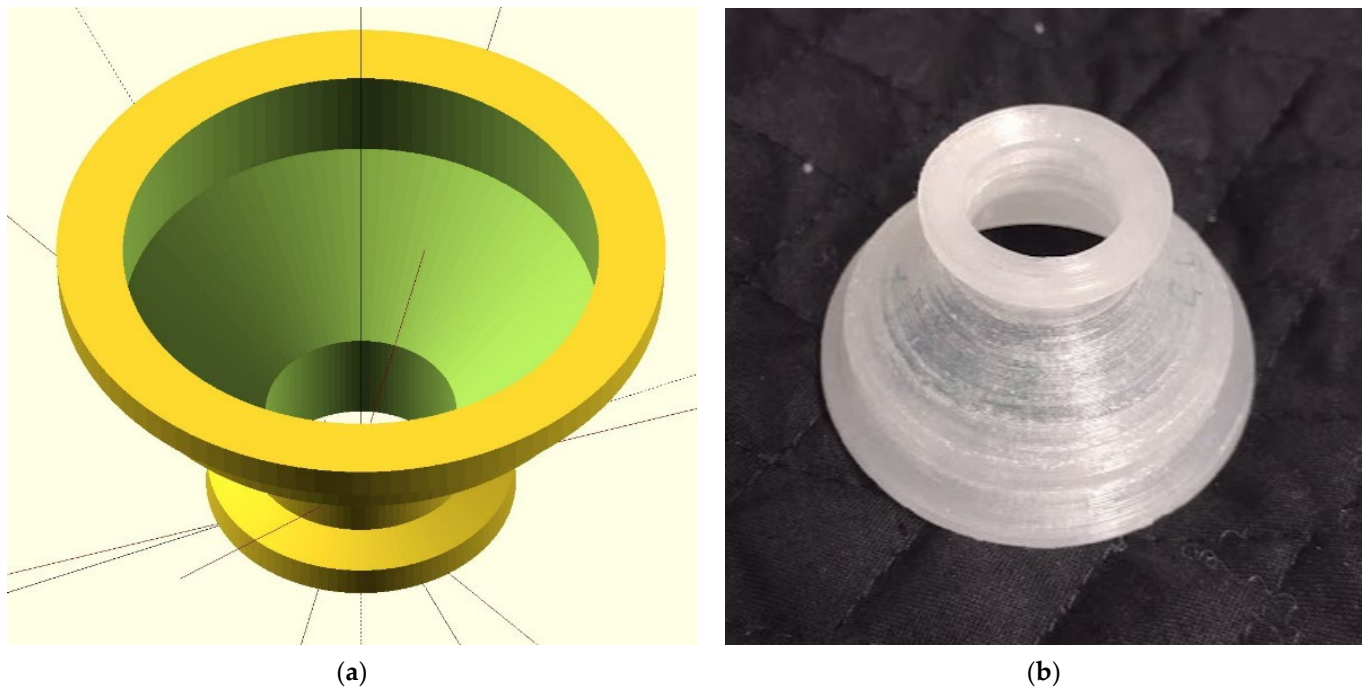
(a) OpenSCAD rendering and (b) photograph of parts designed for sealing tests.
